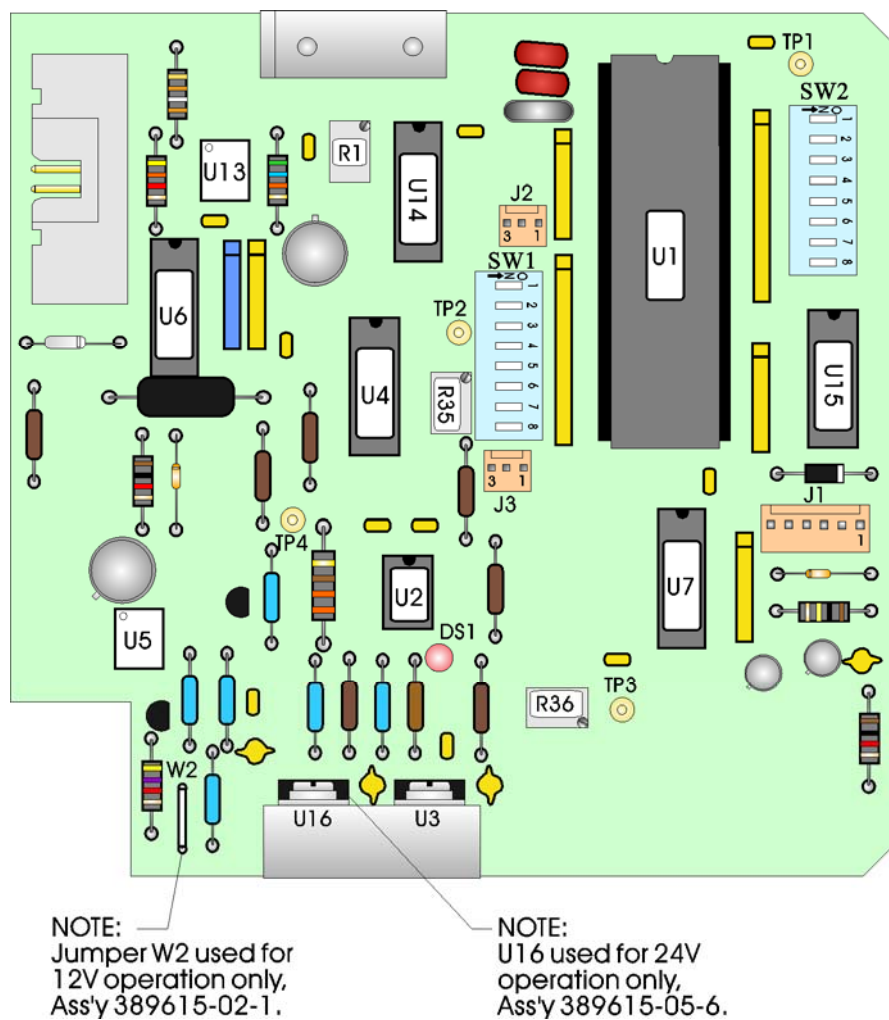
C-17 - Assembly, Analog Type CPU Board with PDM Output
